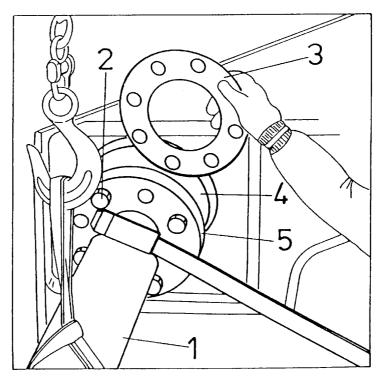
Adjusting the Upper Strut and Tilt Cylinder
